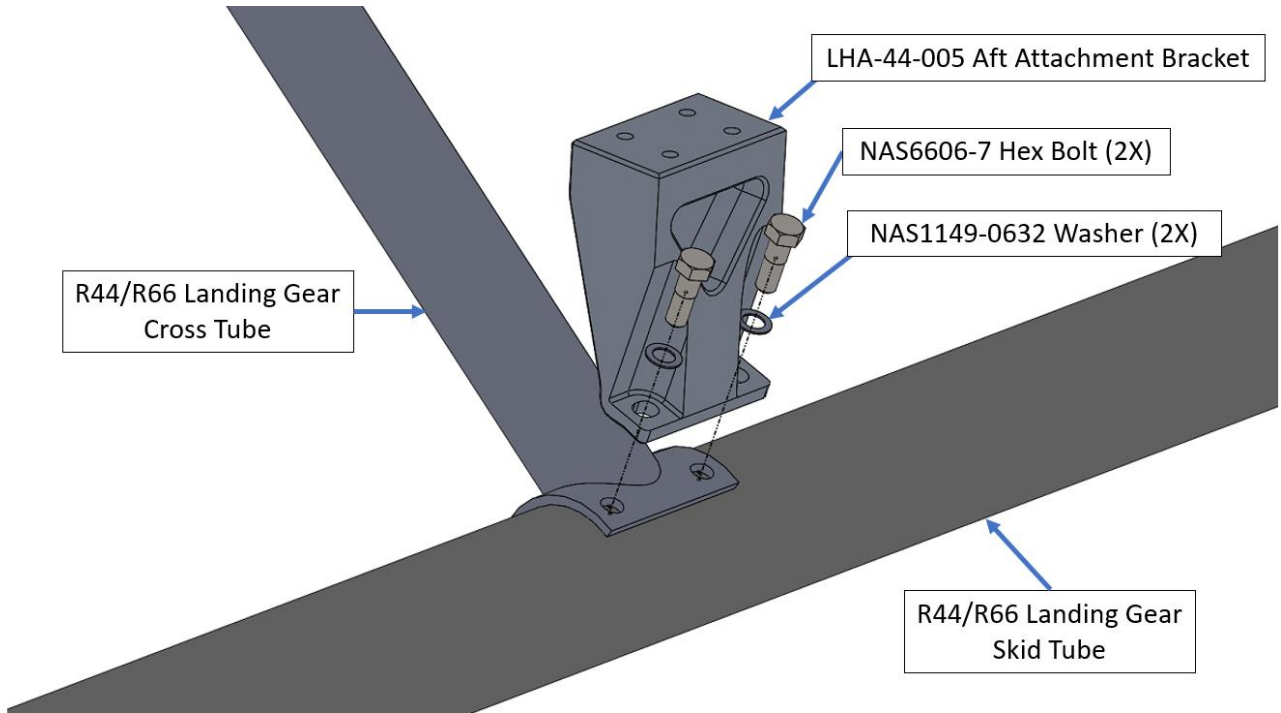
Installation of the LHA-44-005 Aft Attachment Bracket onto the R44/R66 Landing Gear
